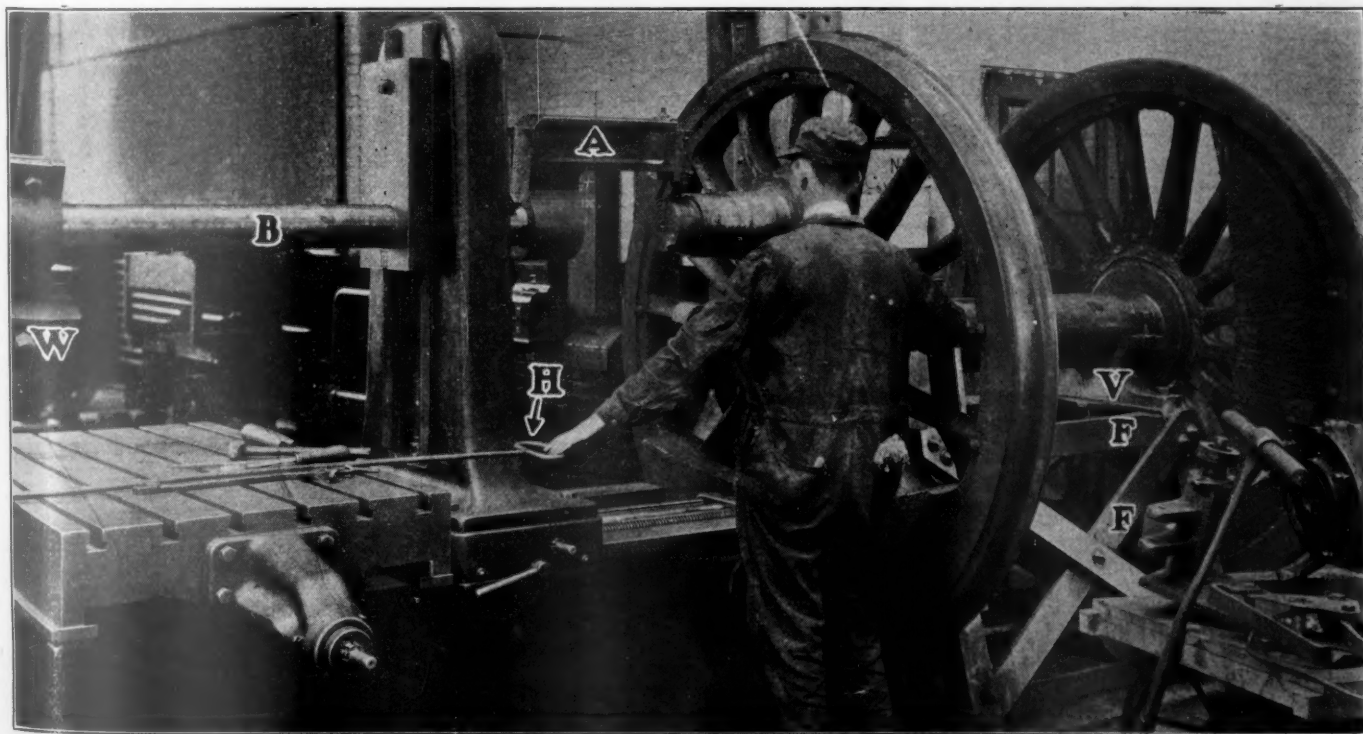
Front View of Boring Mill Attachment for Turning and Rolling Mounted Crank-Pins at the Billerica Shops of the Boston & Maine
